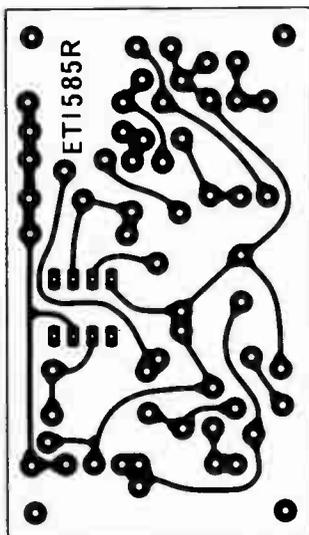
Printed circuit board of receiver. Full size 70 x 40.
